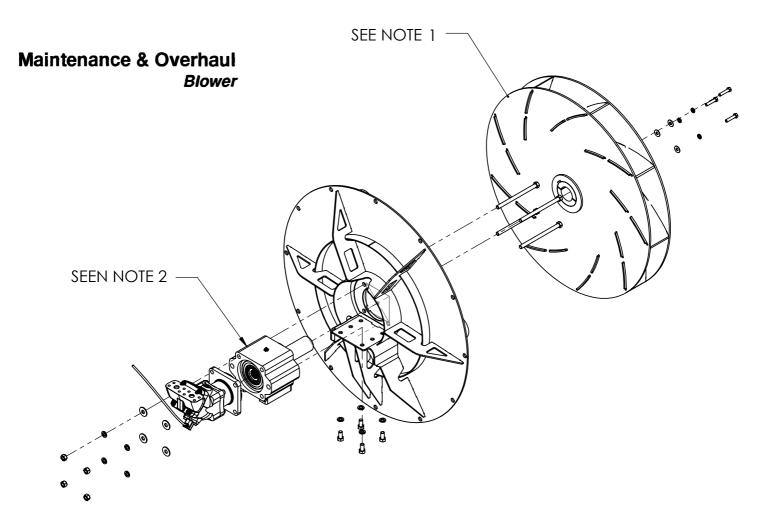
Blower Impeller puller is 6" x 2" x 1/2". Holes are 4" apart and .56" diameter. Do not force impeller off of shaft. Damage to both shaft and impeller could occure.
